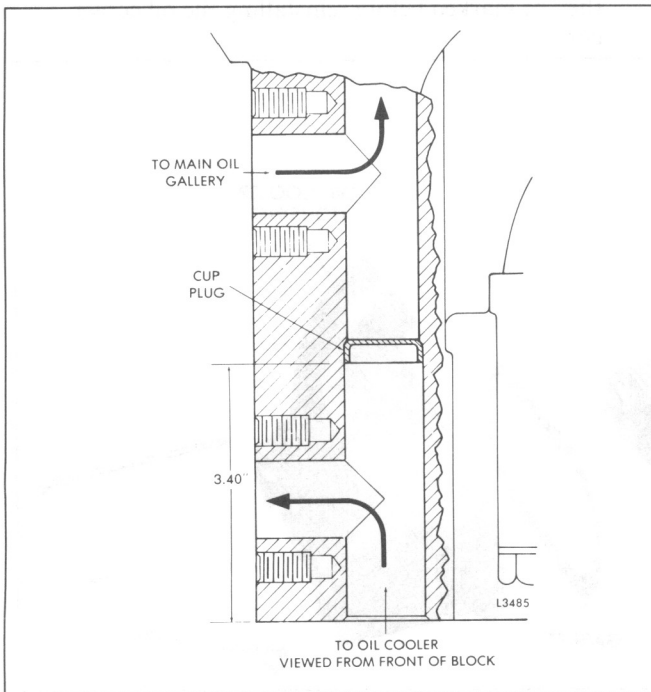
Location of Cylinder Block Oil Gallery Cup Plug
